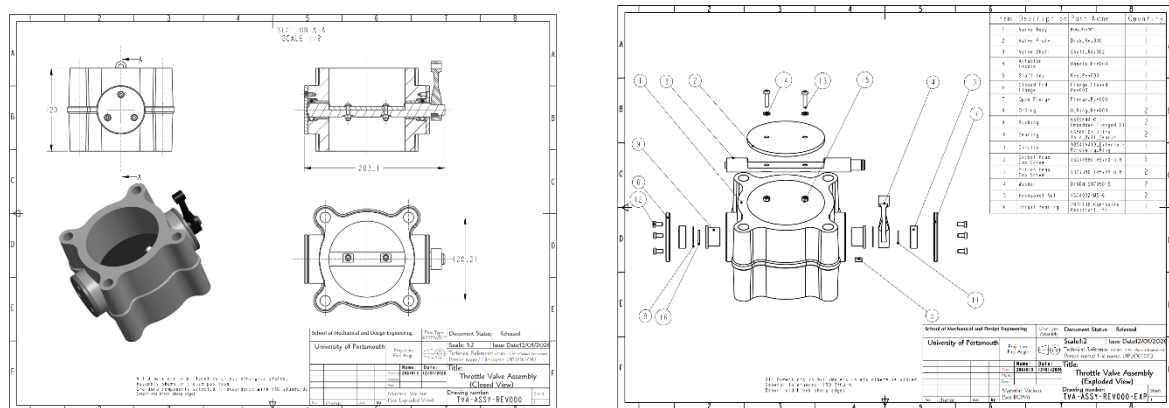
Throttle Valve Assembly (Closed View) Drawing + Throttle Valve Assembly (Exploded View) Drawing
